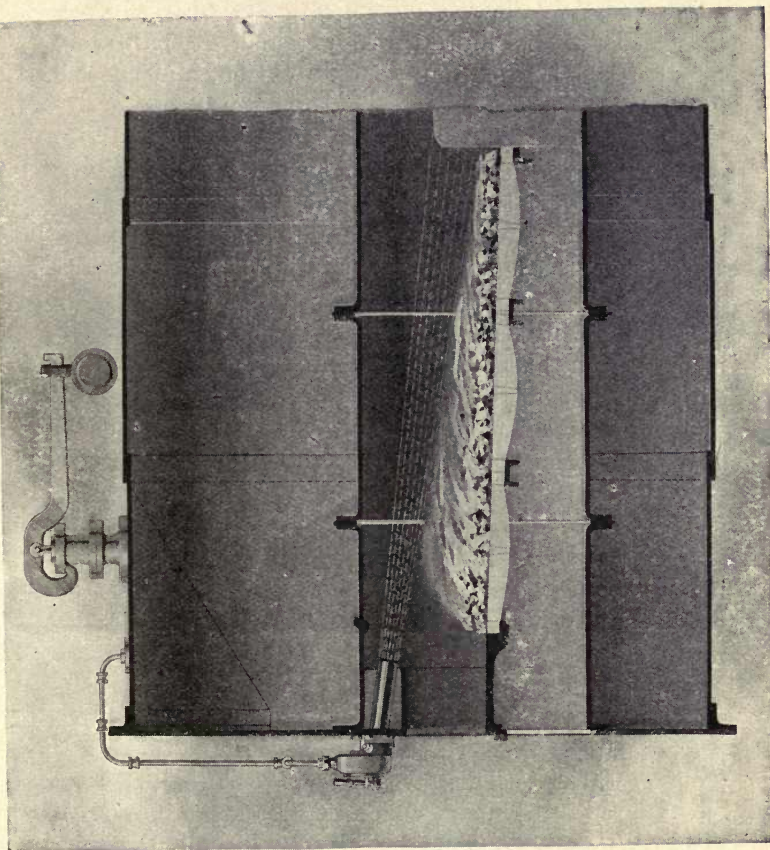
Section of Lancashire Boiler fitted with the Simplex Smoke Preventer.
